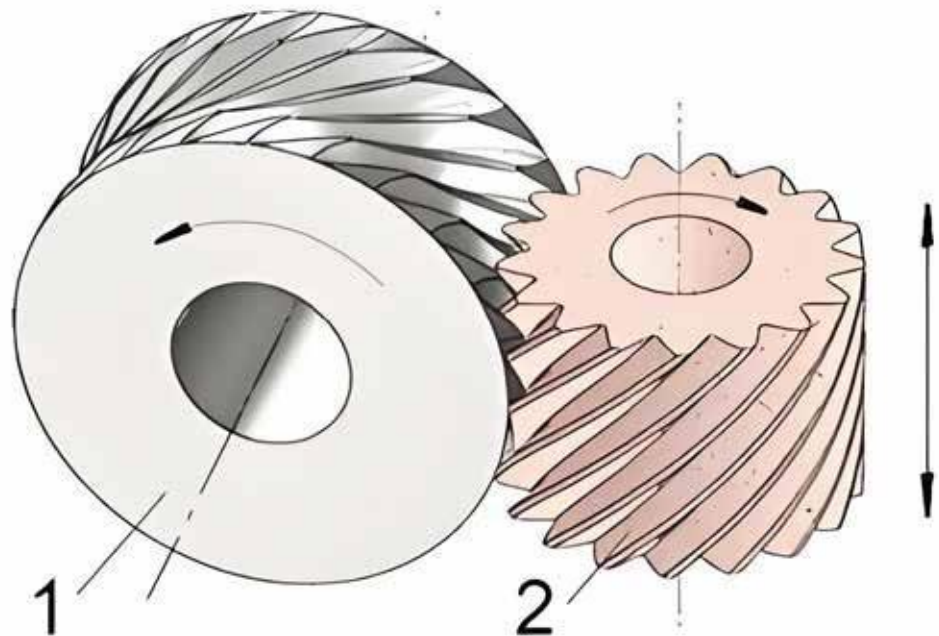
Enveloping helical gear honing; 1 – enveloping helical gear, 2 – gear honing or tooth grinding tool.
